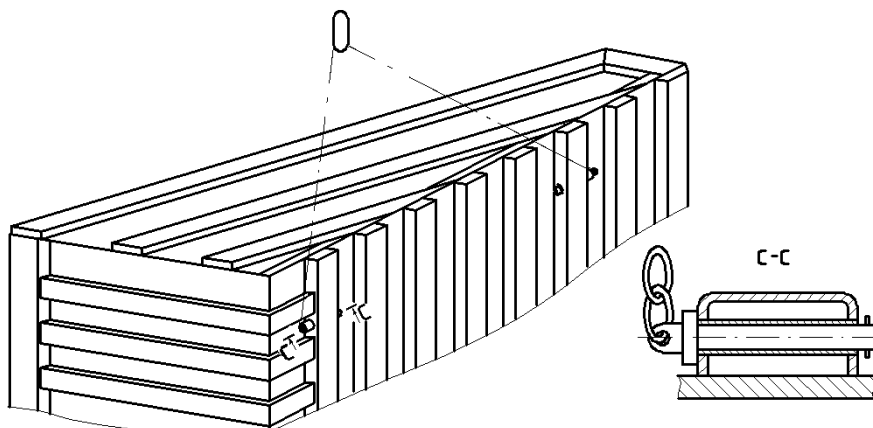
Diagrams of slinging the body for turning when welding
